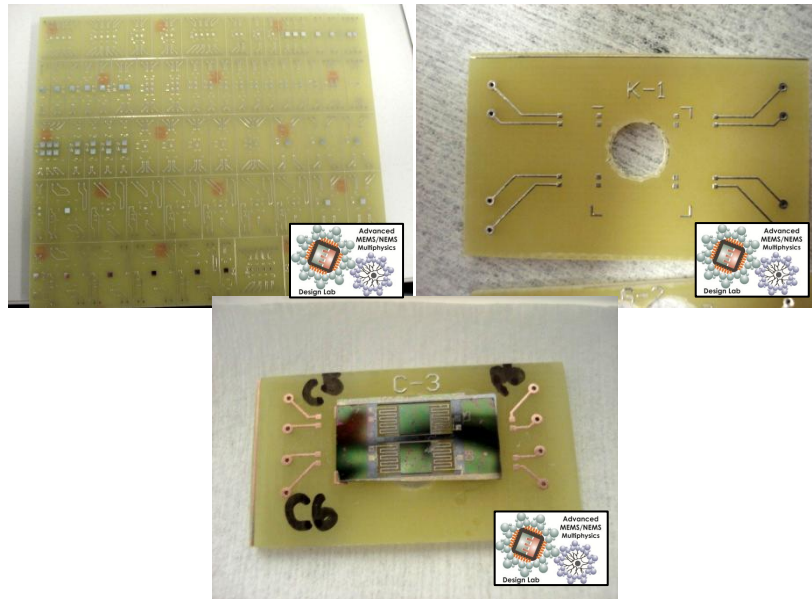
Solid PCBs developed for harvester packaging. (Top Left) full sheet of Solid PCB. (Top Right) separated and prepared individual PCBs. (Bottom) a mechanically packaged harvester on an individual PCB.
